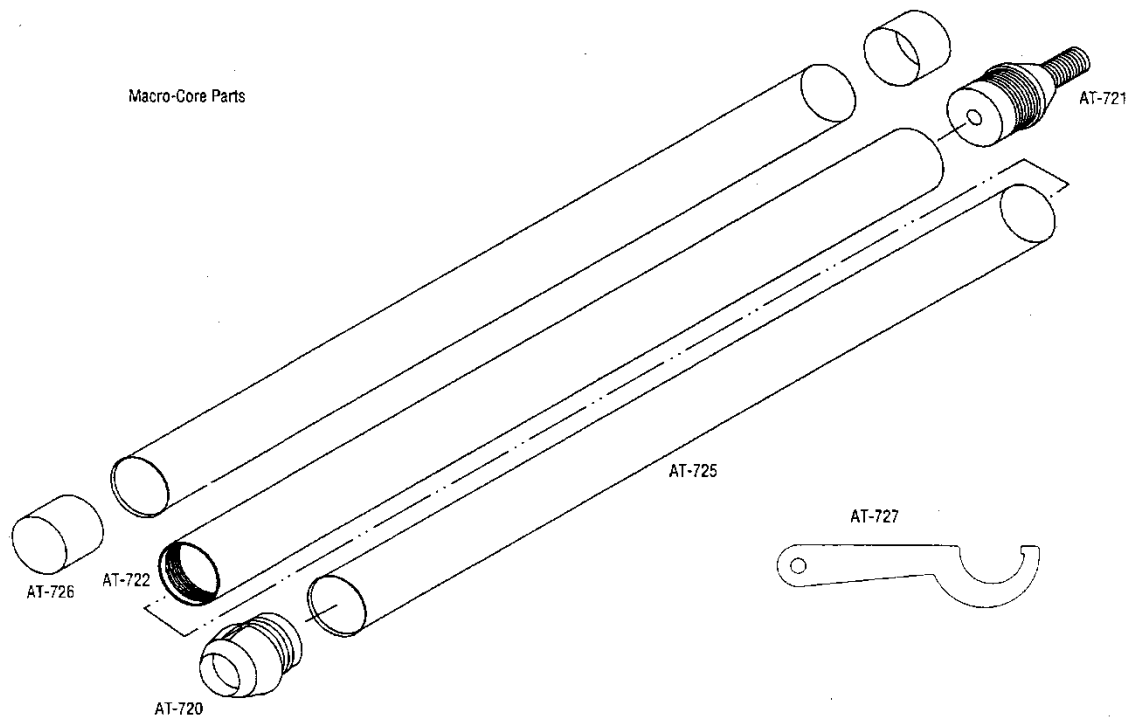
Soil Sampling Tools – Probe Drive System/Large Bore
